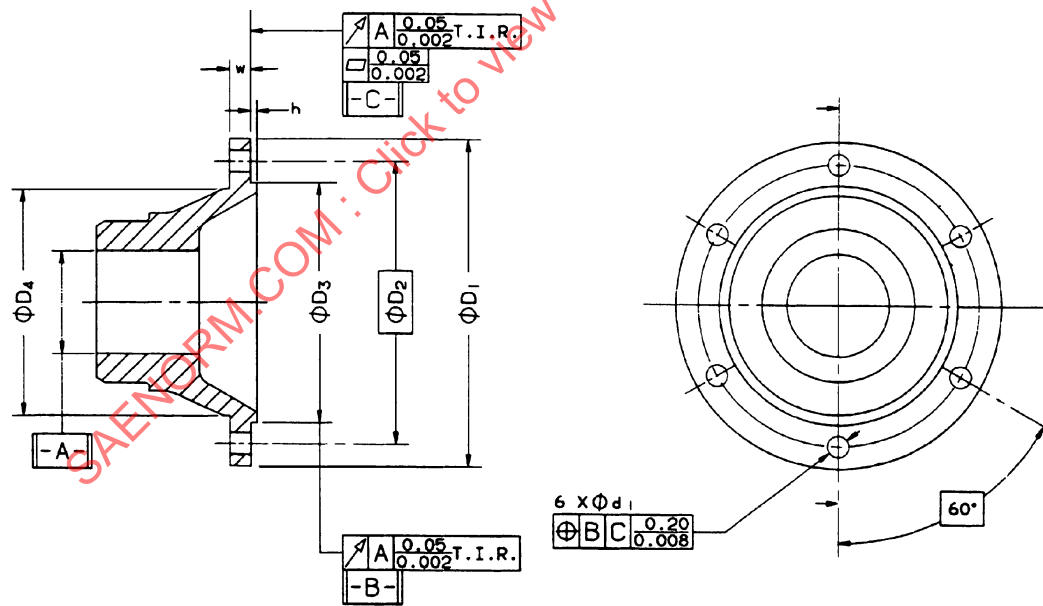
TYPE A COMPANION FLANGES—TRUE POSITION, FLATNESS AND RUNOUT TOLERANCES—mm/in
